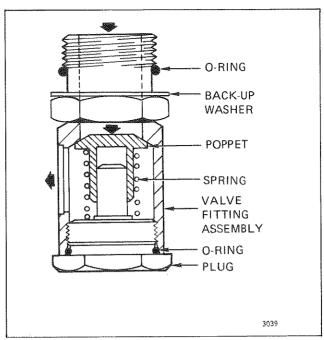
COOLING OIL RELIEF VALVE ASSEMBLY, POWER CONTROLLED WINCH
